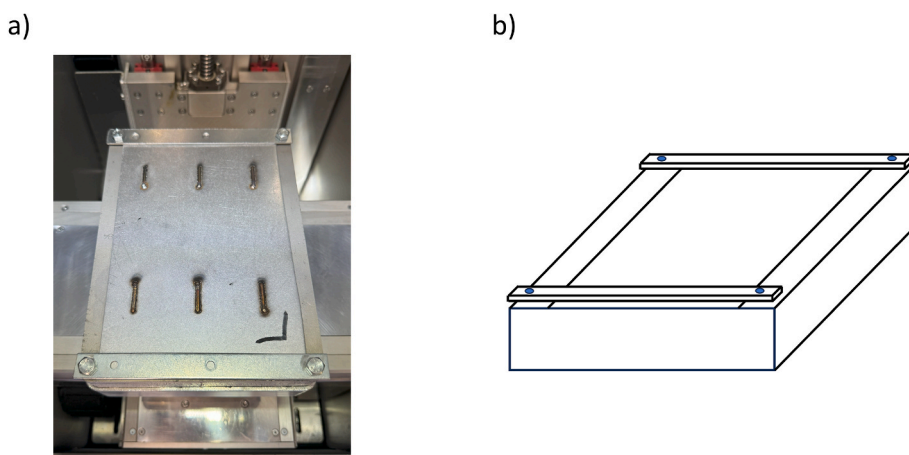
a) Sheet clamping system; b) schematization of the two brackets of the clamping system necessary to maintain the sheet in a fixed position on the working table.
